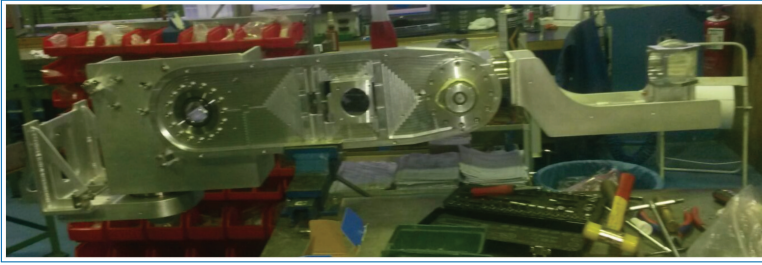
Arm mechanical integration (shoulder and elbow).
